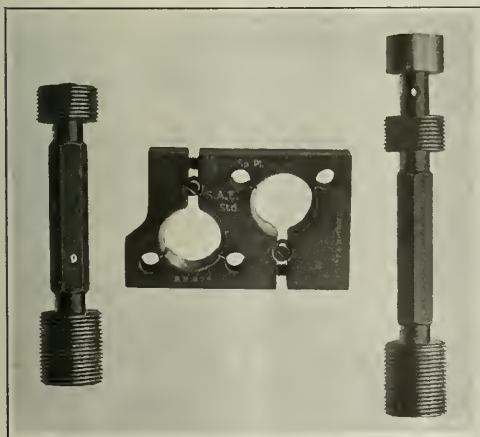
Automobile Engine Spark-plug Thread Gage Set made by the Pratt & Whitney Co.
